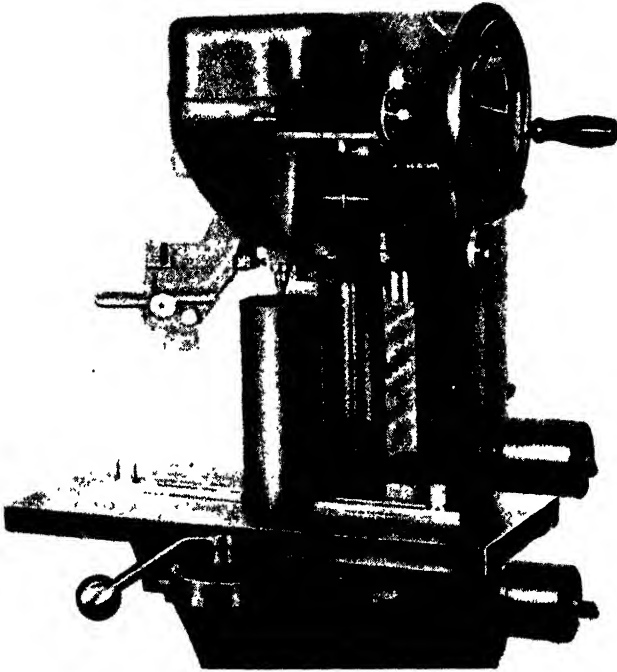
MACHINE IN POSITION FOR MAKING INDENTATION ON END OF SPECIMEN CYLINDER, SHOWN ON TABLE
